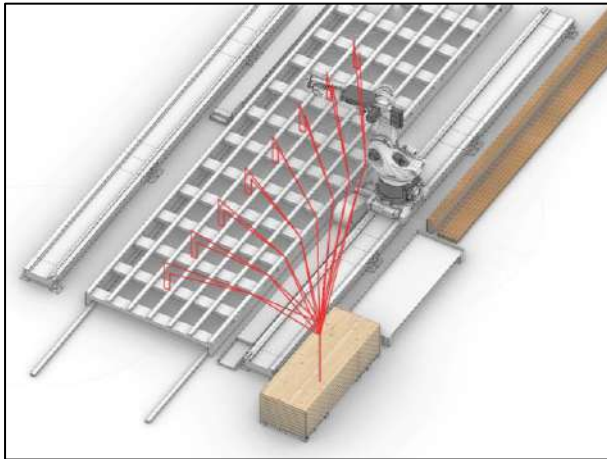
Diagrammatic overview of the robotic assembly process with the highlighted tool path of a robot for handling a stack of CLT panels during assembly
